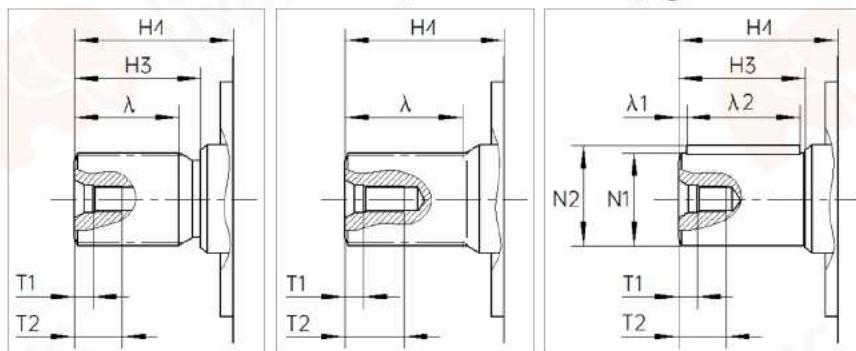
Dimensions, EP/13, EK/13 (left: port code 11; right: port code 12)
